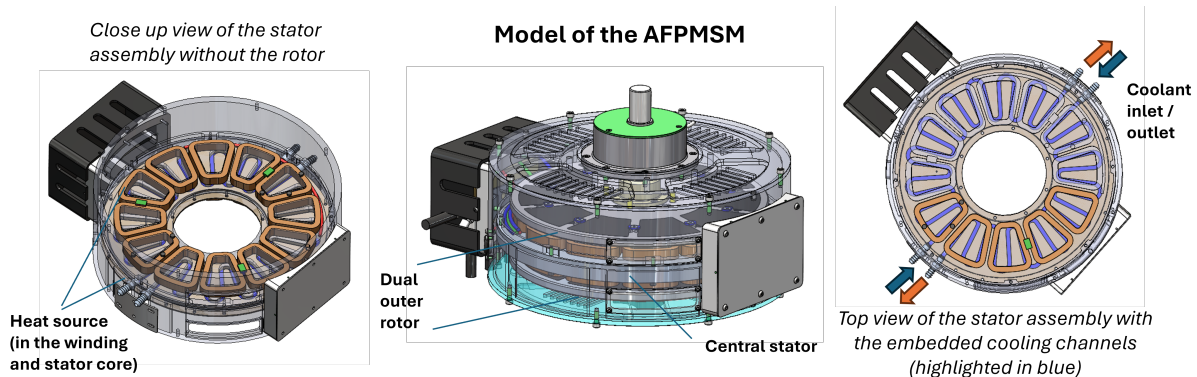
Model of the AFPMSM machine and illustration of the embedded cooling channels.
